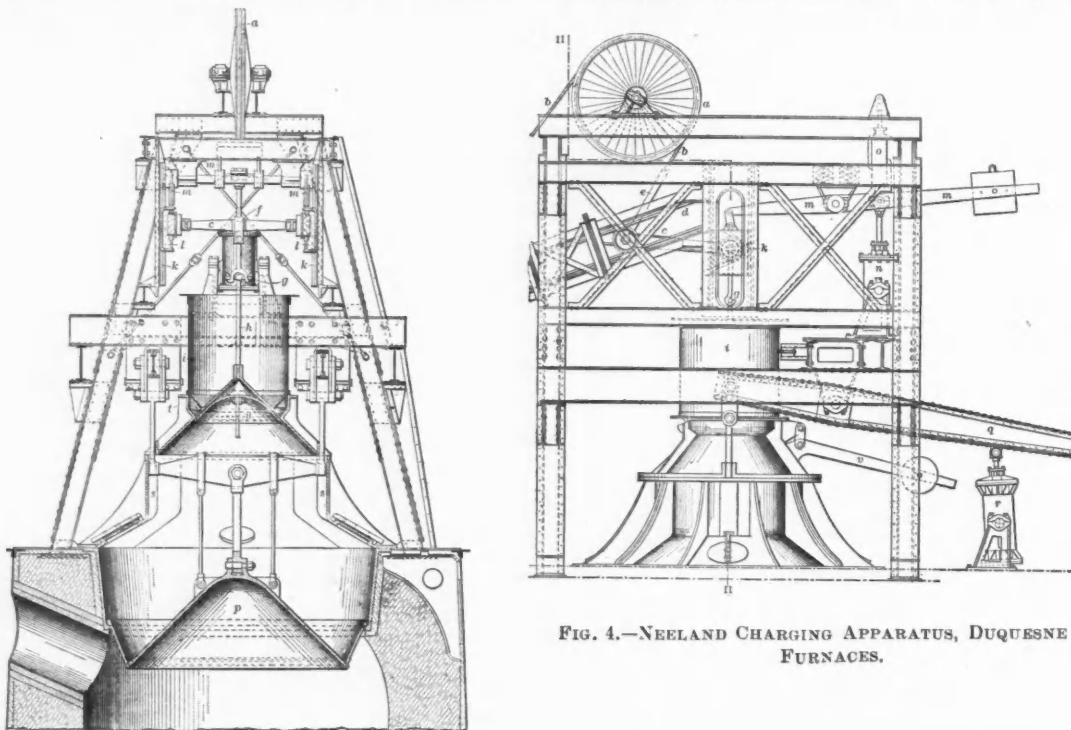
NEELAND CHARGING APPARATUS, DUQUESNE FURNACES.
